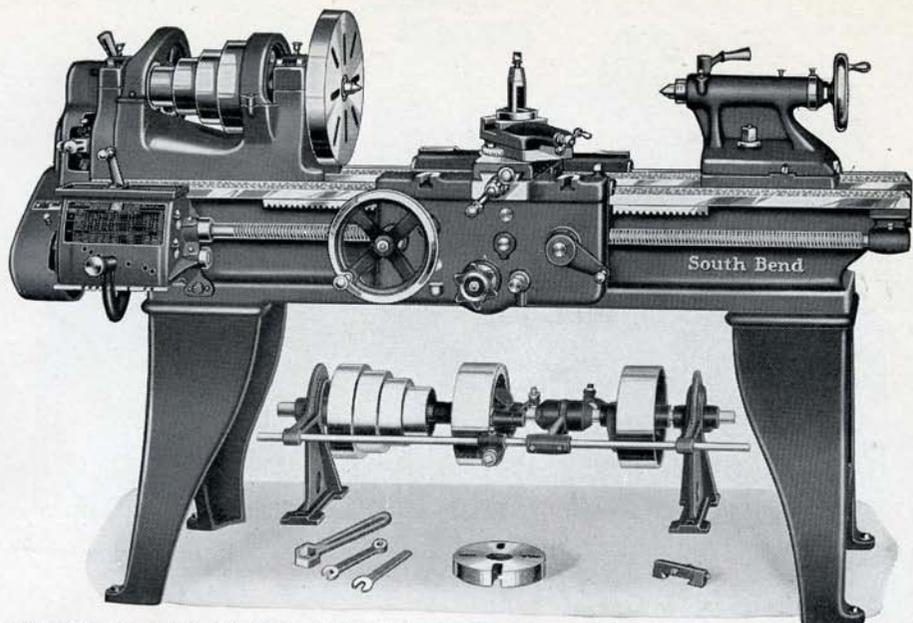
Cat. No. 17-C, 16"x6' South Bend Quick Change Gear Countershaft Driven Lathe. \$657.00
